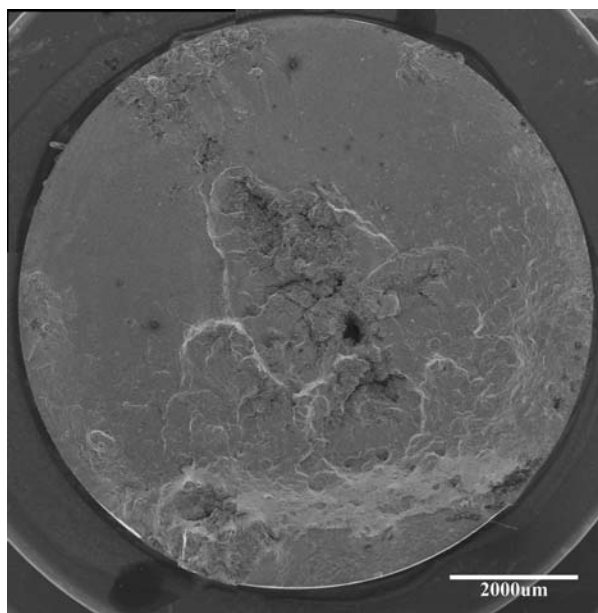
Macroscopic View of a Straight Cylinder Specimen Fracture Surface, $S_a = 196$ MPa (Specimen B7)
